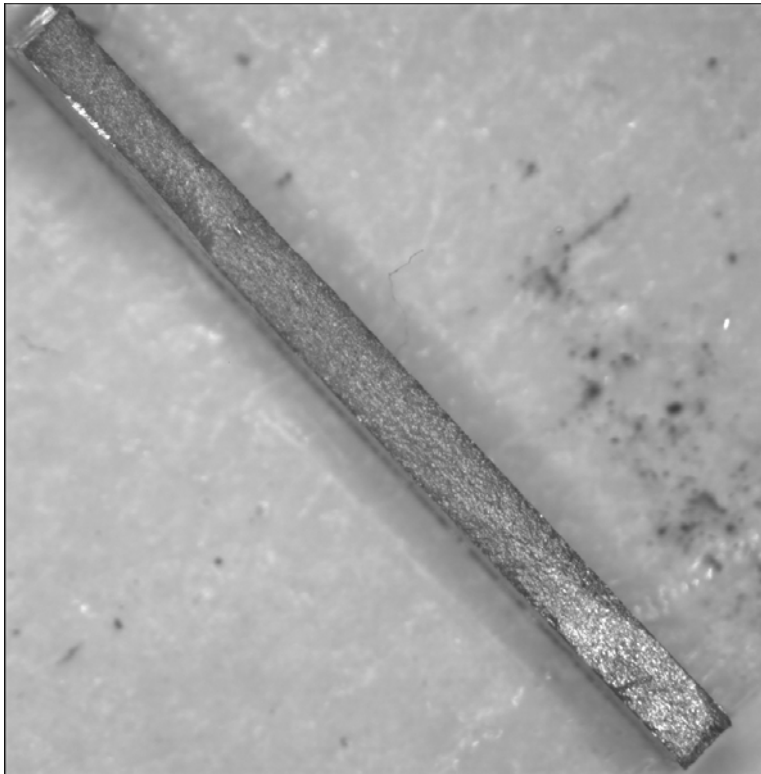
Fracture Surface of Specimen 5926.
